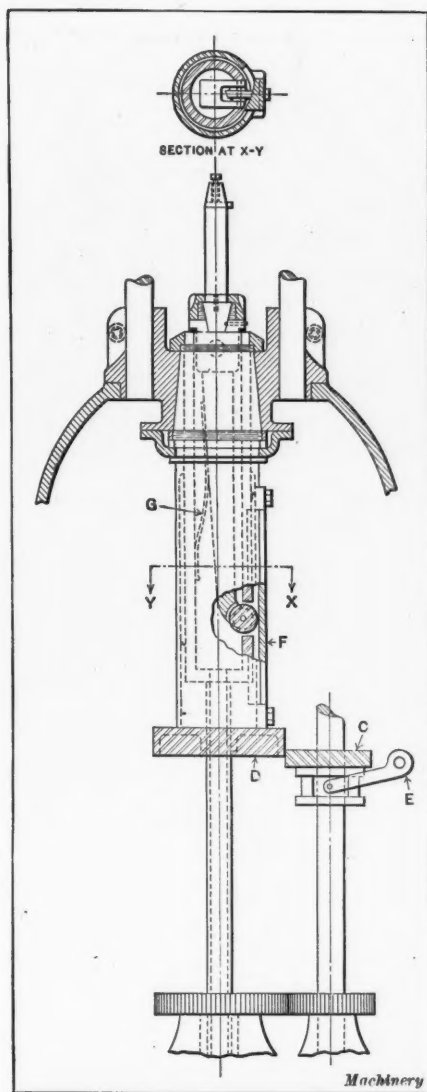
Construction of Cutter-holder, Spindle and Sleeve
